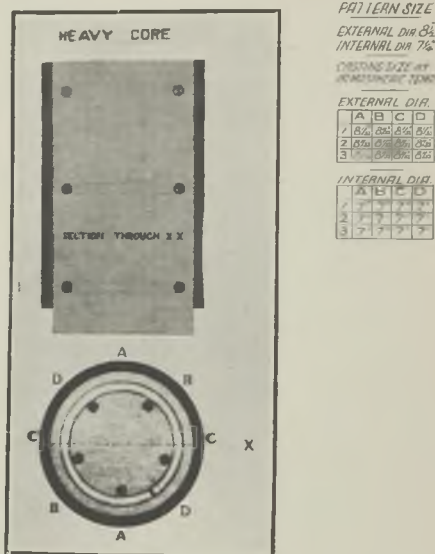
DIMENSIONAL CHANGES IN BUSH CASTING.
